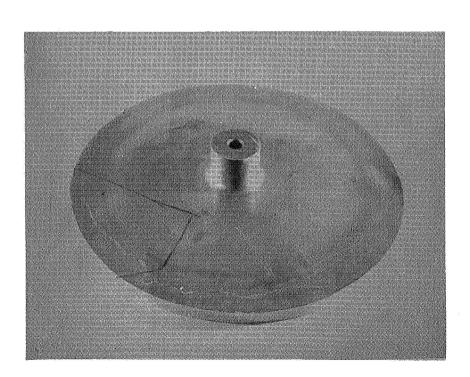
TOOLING BOSS WITH FAILED WELD 1/3 SIZE
